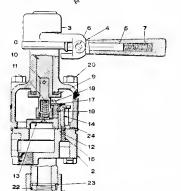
Motorman's Straight Air Brake Valve, Type SY.
